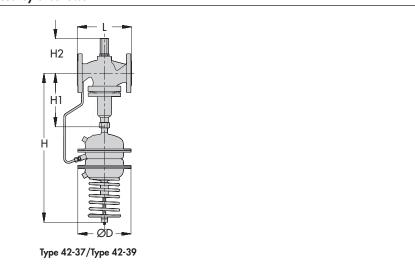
Regulator with Type 2423 Valve balanced by a bellows
